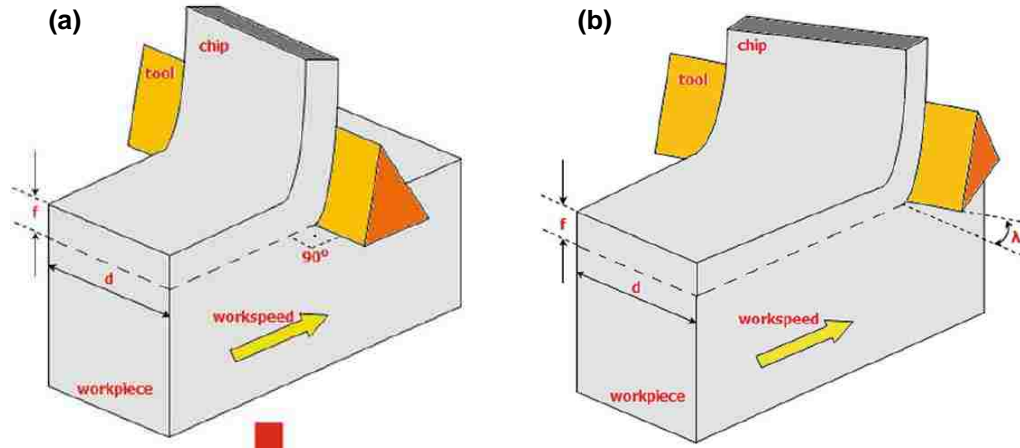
Schematic of metal cutting showing (a) orthogonal cutting process where the cutting tool is perpendicular to the direction of machining, and (b) oblique cutting process where the cutting tool is at an angle ' λ ' to the direction of machining [11]
